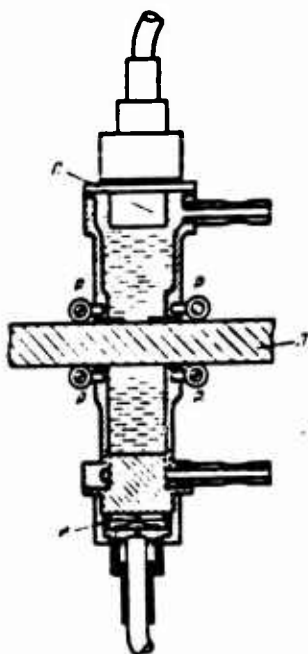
Trost searching heads with jet contact, intended for control of sheets and plates: J - controlled sheets; V - radiating; H - receiving head; P - rollers.
